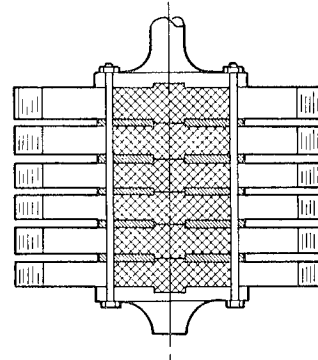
UMTA Flywheel Trolley Coach Rotor
